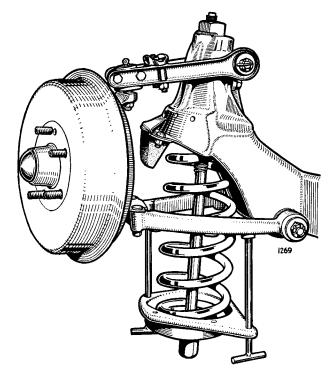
Showing the compressor in position prior to the removal of the Coil Spring.
